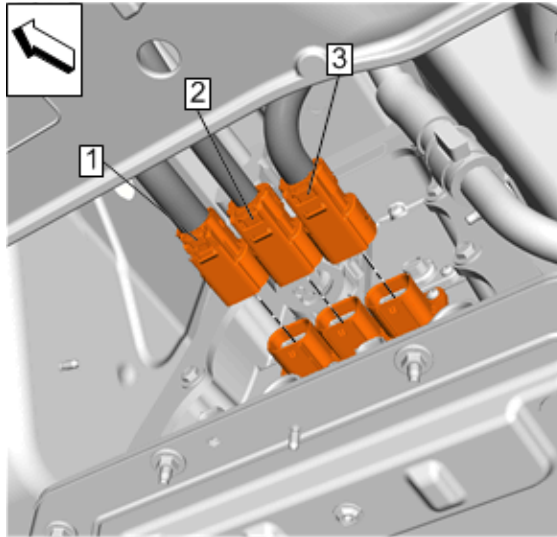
Cabin Heater Control Module Harness Connector, A/C Compressor Harness Connector And Battery Charger Harness Connector
